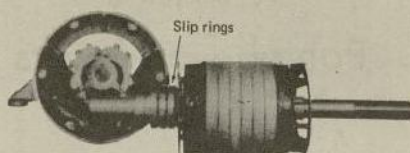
A wound rotor and an end plate of a three-phase motor.
